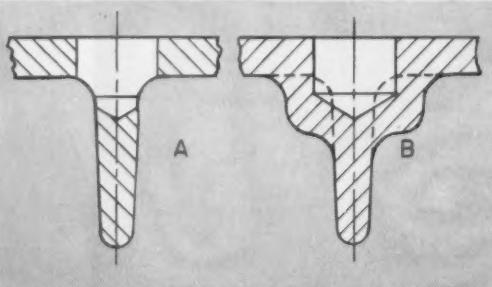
(A)—A shallow hole is machined into a rib of the casting. (B)—A round boss of generous proportions should be provided around the drill point of the hole.
